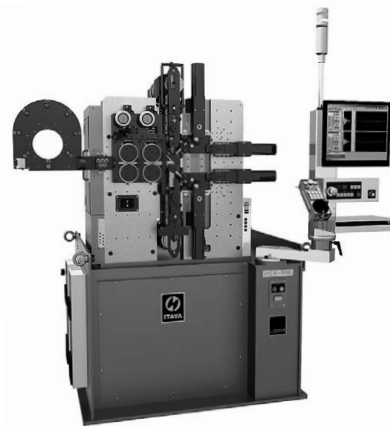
Spring forming machine (Image source: The Itaya Engineering Ltd.)
